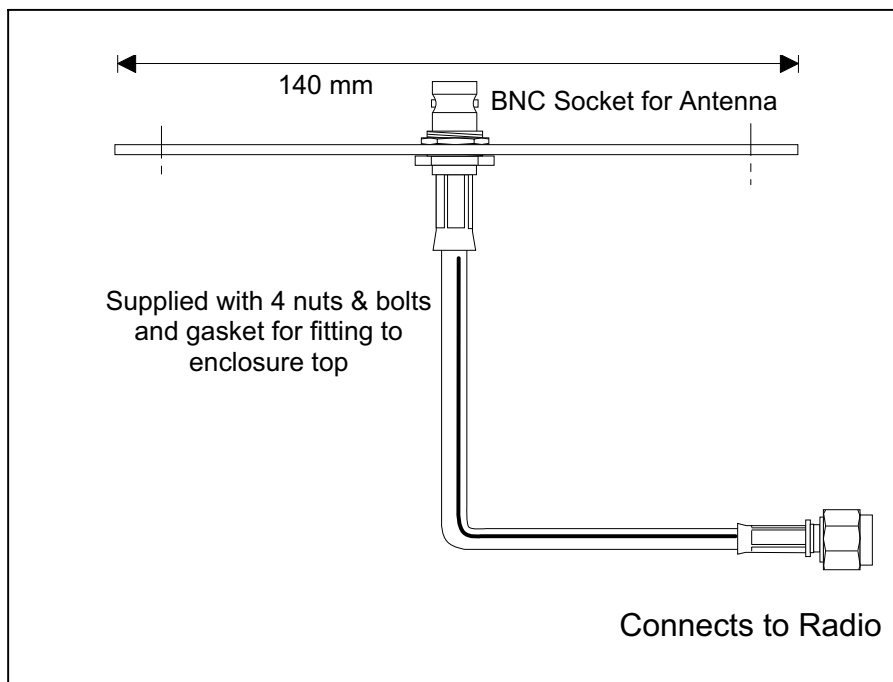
Mechanical Drawing of Antenna Top Plate Mounting Kit
